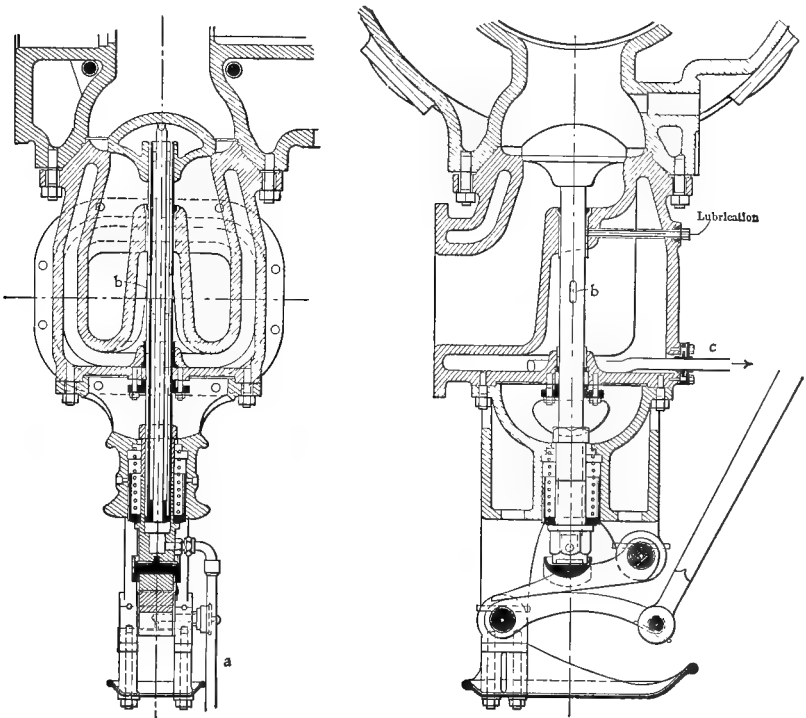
Nürnberg Exhaust Valve, Old Type, Showing Cooling, Lubrication and Operating Mechanism.
